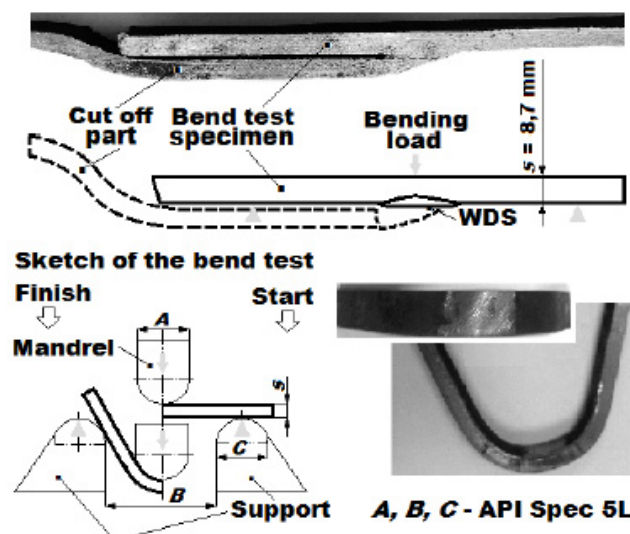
Way of performing the bend test on the PF-CMC welded joint and the results of this test
